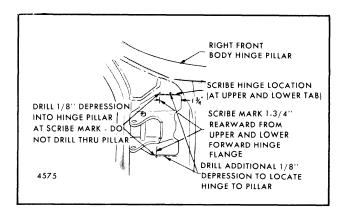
Locating Hinge Position on Body Hinge Pillar - "X" Styles
